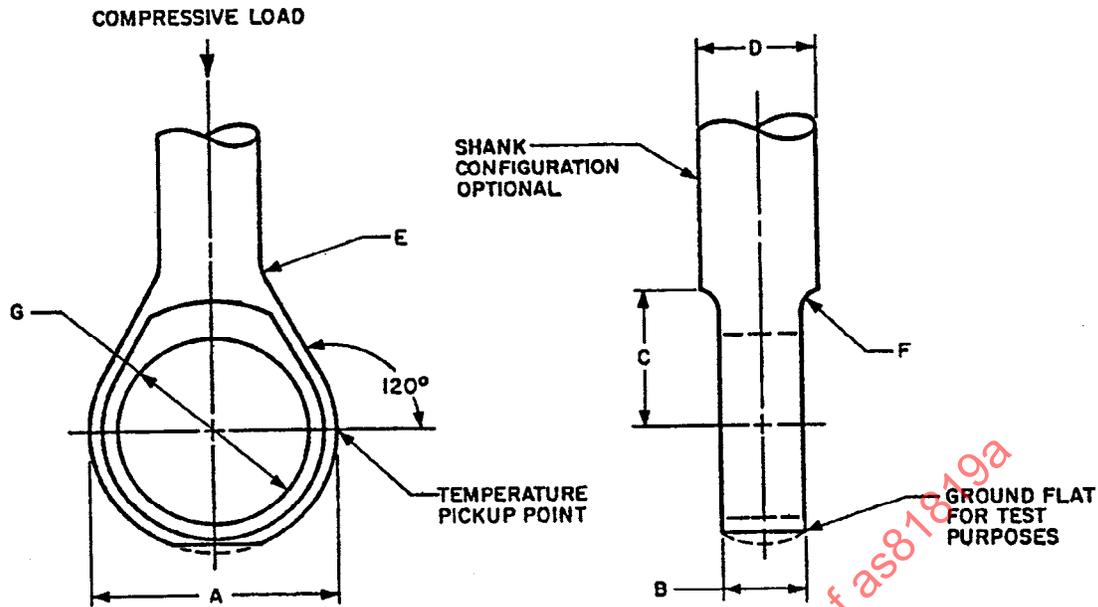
AXIAL STATIC TEST LOAD TEST FIXTURE
